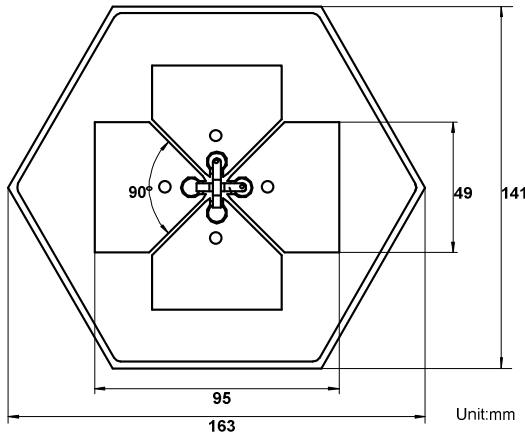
Mechanical drawing of the hexagonal cavity-backed dipole.
